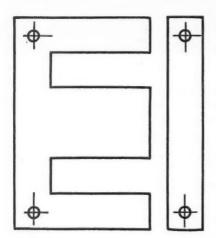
Drawing of standard "E" and "I" core laminations for radio transformer amplifying colls. Laminations of this type are blanked from .016 to .018 in. steel strips.
